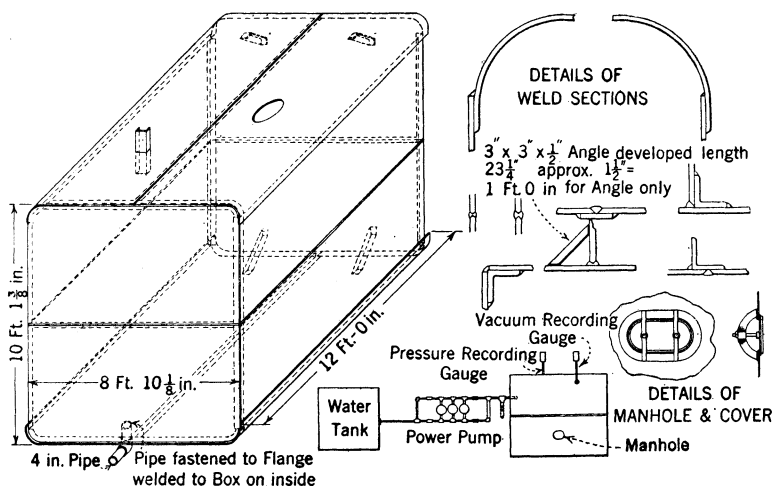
OUTLINE AND DIMENSIONS OF ARC-WELDED STEEL BOX
